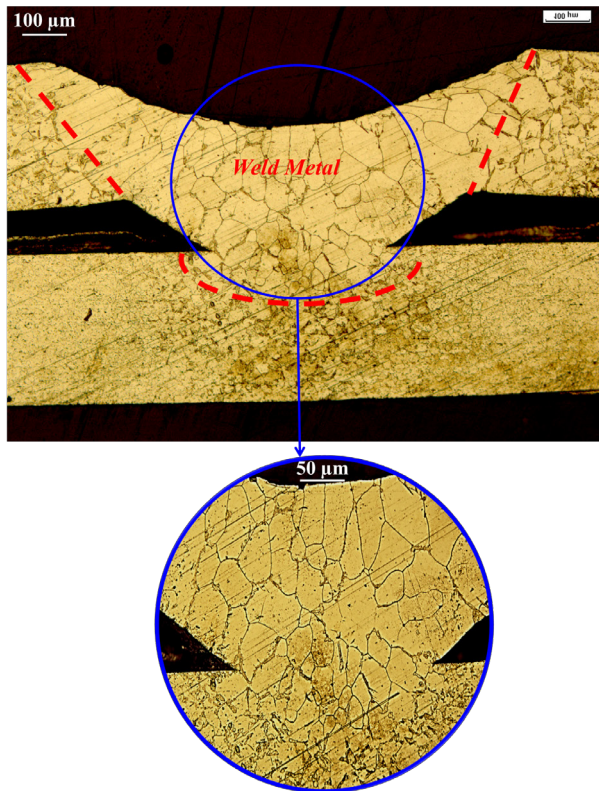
Cross section of lap joint between two AISI 430 sheets made with pulsed Nd:YAG laser welding.
